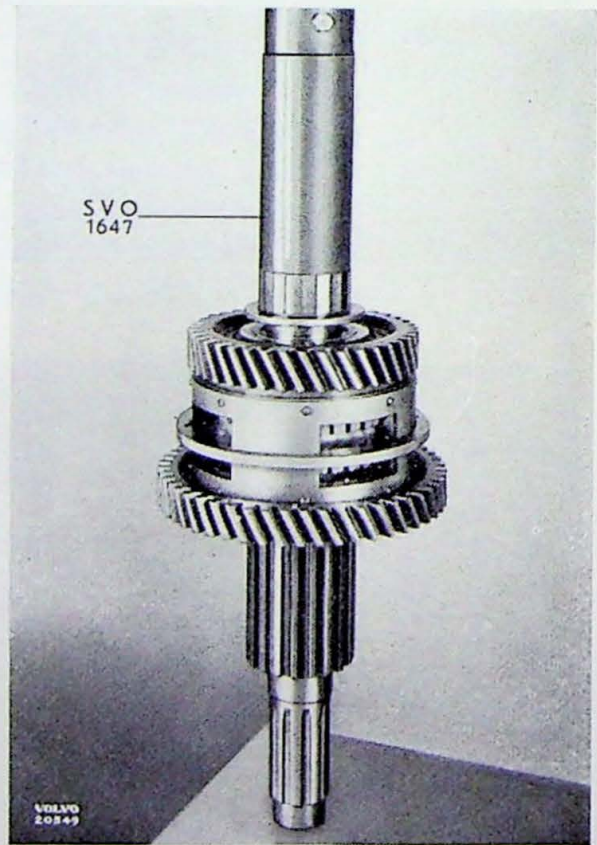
31. Fitting the bushing for 5th speed gear on the mainshaft.
